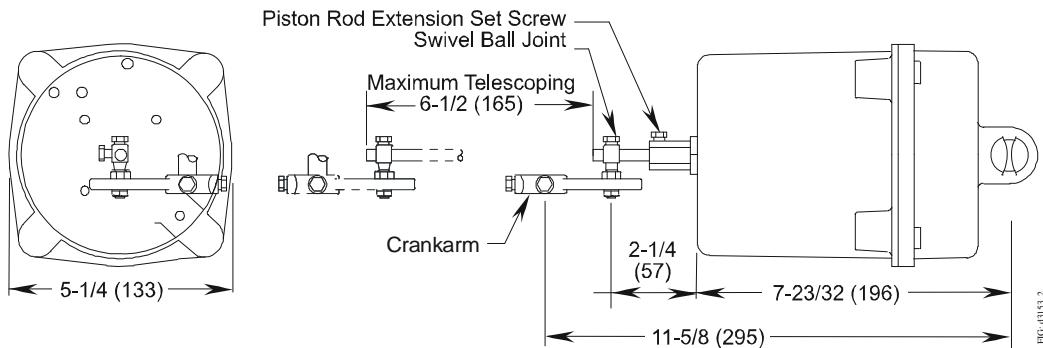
D-3153 Pneumatic Actuator Dimensions, in. (mm)
